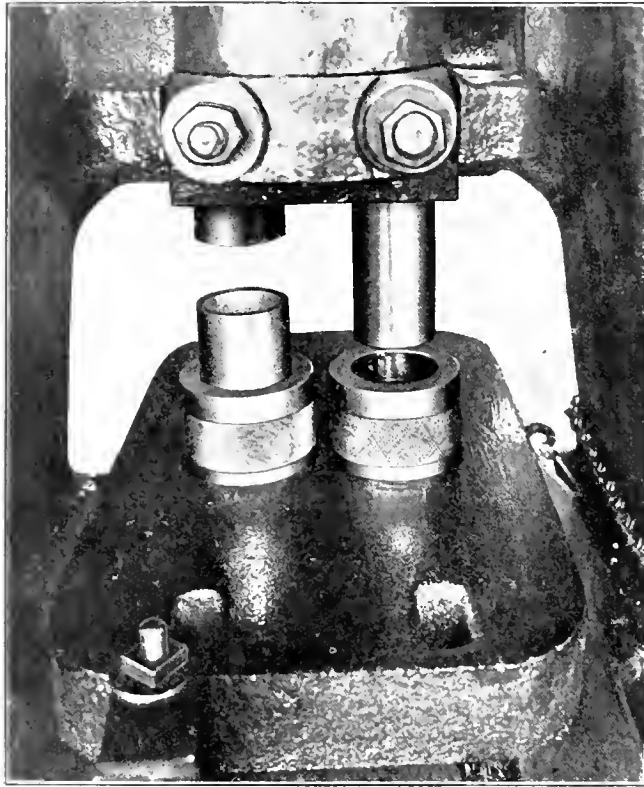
PRESSING IN BROACHING RING—OPERATION 7
